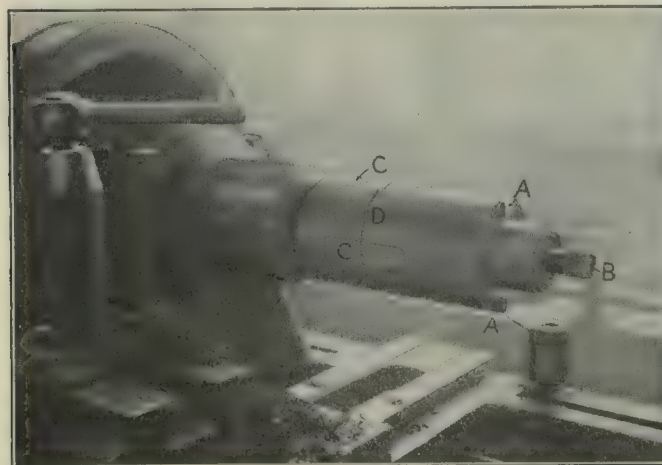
DETAILS OF THE EXPANSION ARBOR
